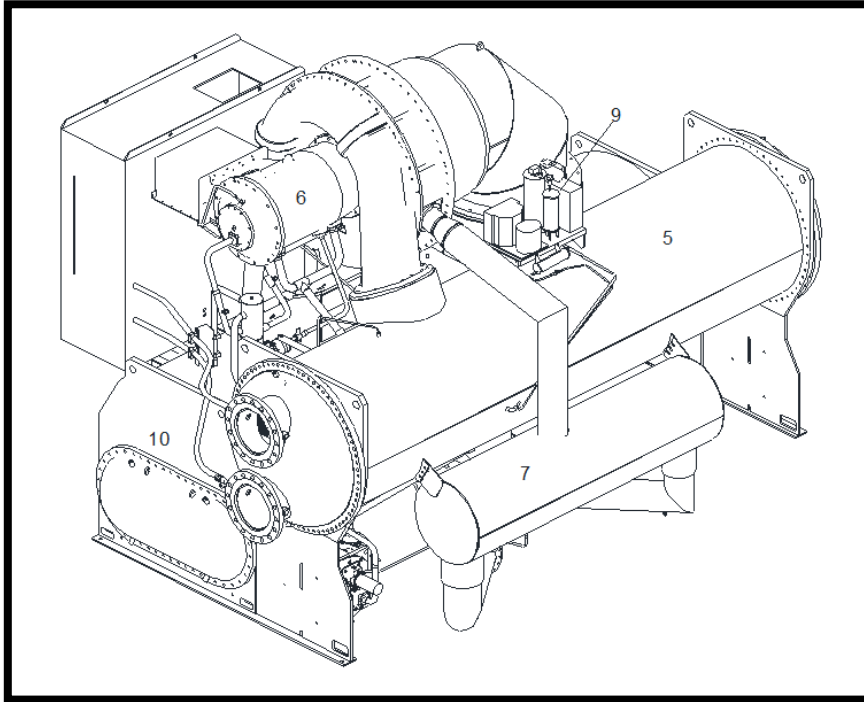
Back View of Condenser Right Side Outlet Cooling System
